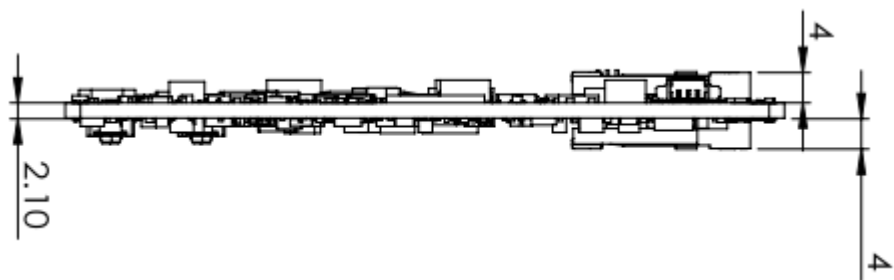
Pentium Series Board Mechanical Diagram – Side
